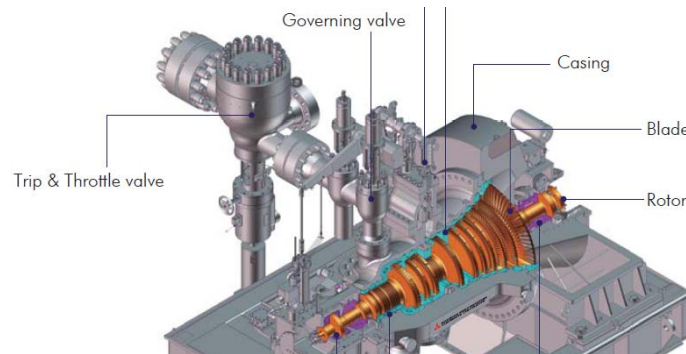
Trip and Throttle Valve (courtesy: Mitsubishi)
